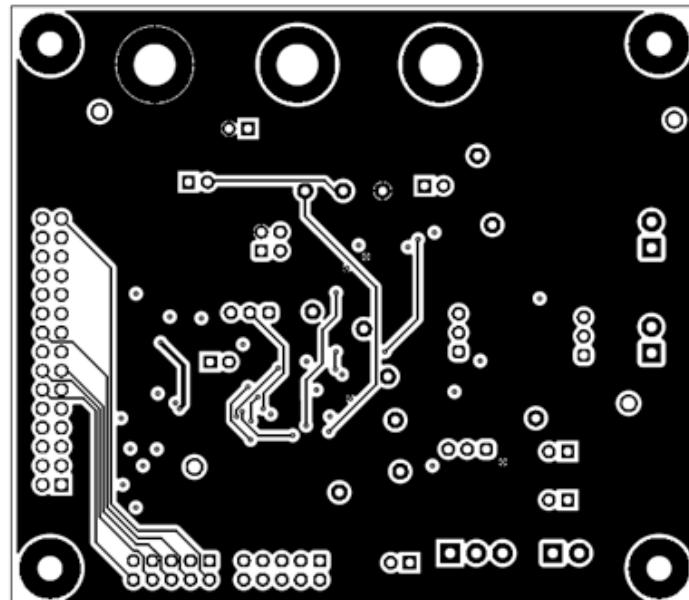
AFE881H1EVM PCB Bottom Layer Layout
